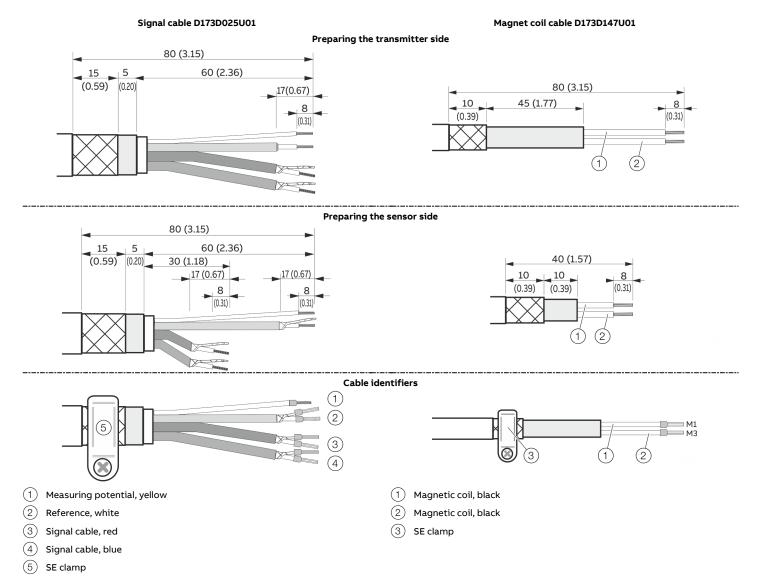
Preparing the signal and magnetic coil cable sensor model SE21, SE21F
